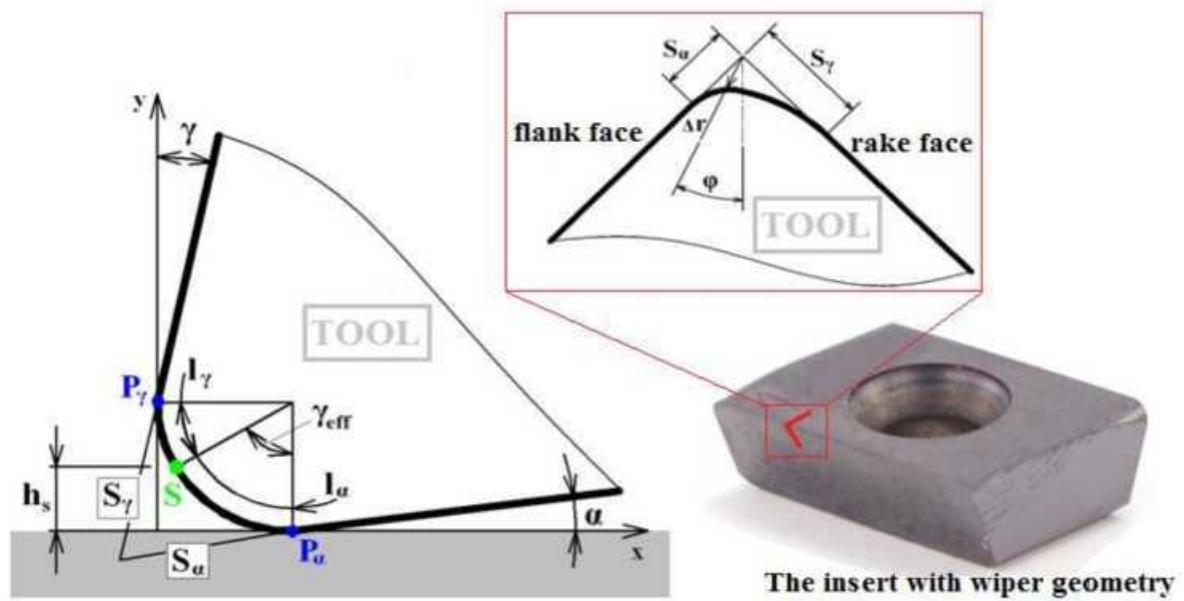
Parameters of cutting-edge geometry [10]
